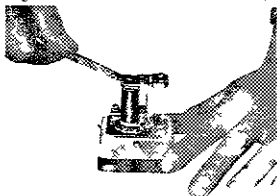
Adjusting Regulator Adjusting Arm W526
